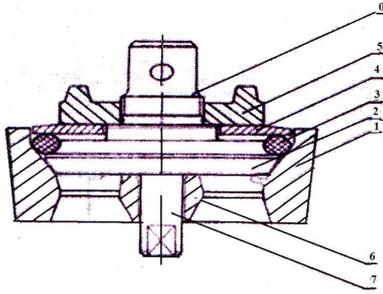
New design of mud pump valve: 1 – valve seat; 2 – poppet; 3 – packing ring; 4 – bushing; 5 – nut; 6 – crosshead; 7 – valve spigot; 8 – limiter.
